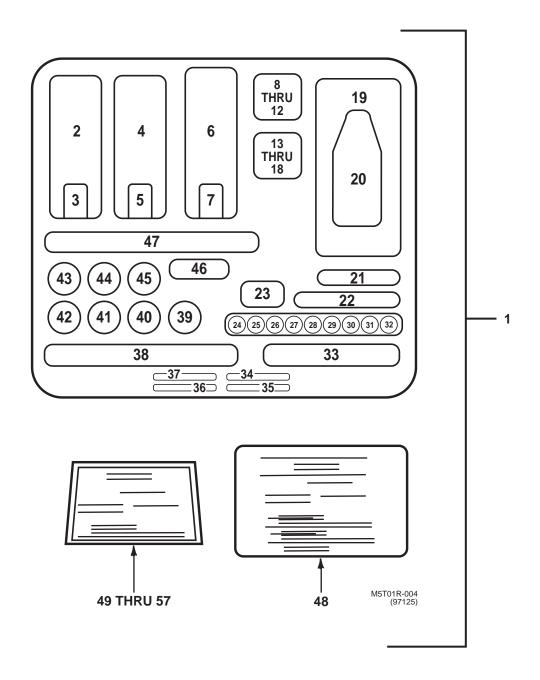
Group 9600 Special Tools (Sheet 1 of 3)
